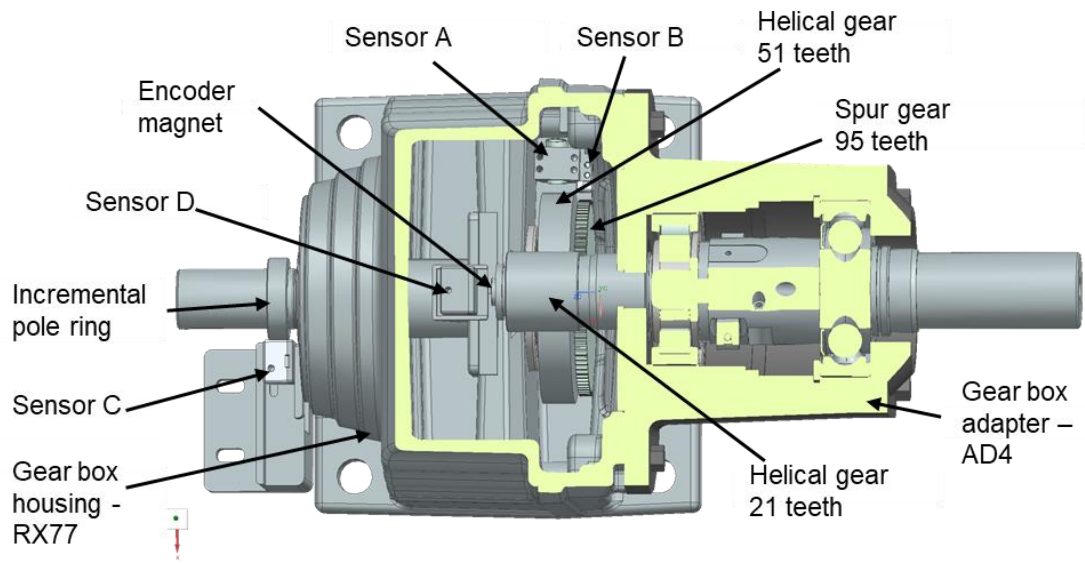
Integration of Magneto-resistive sensors CAD-illustration
